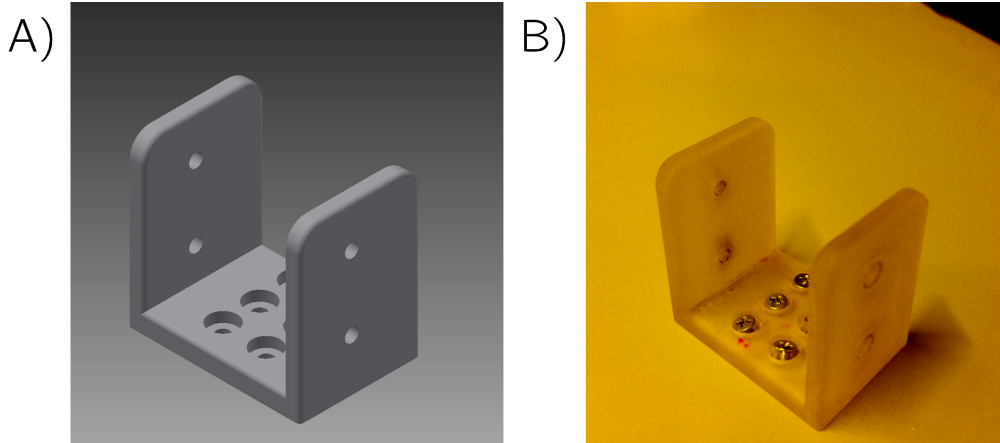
Mount for the uEye camera to place the center of the camera where the window of the cuvette would be: A) CAD model, B) printed mount.
